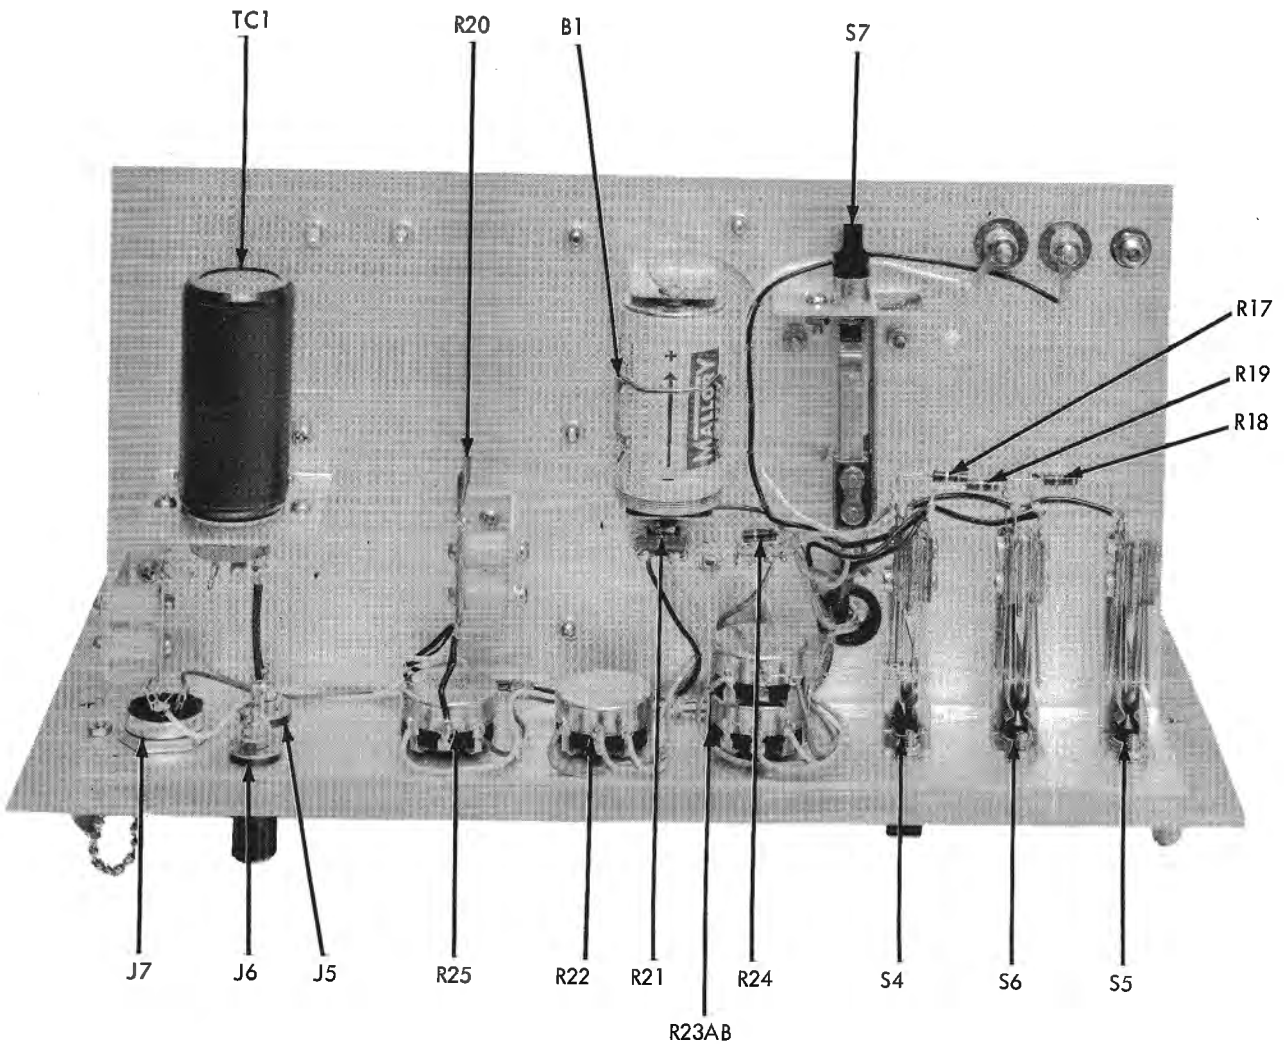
CHASSIS ASSEMBLY (sheet 1 of 2)
